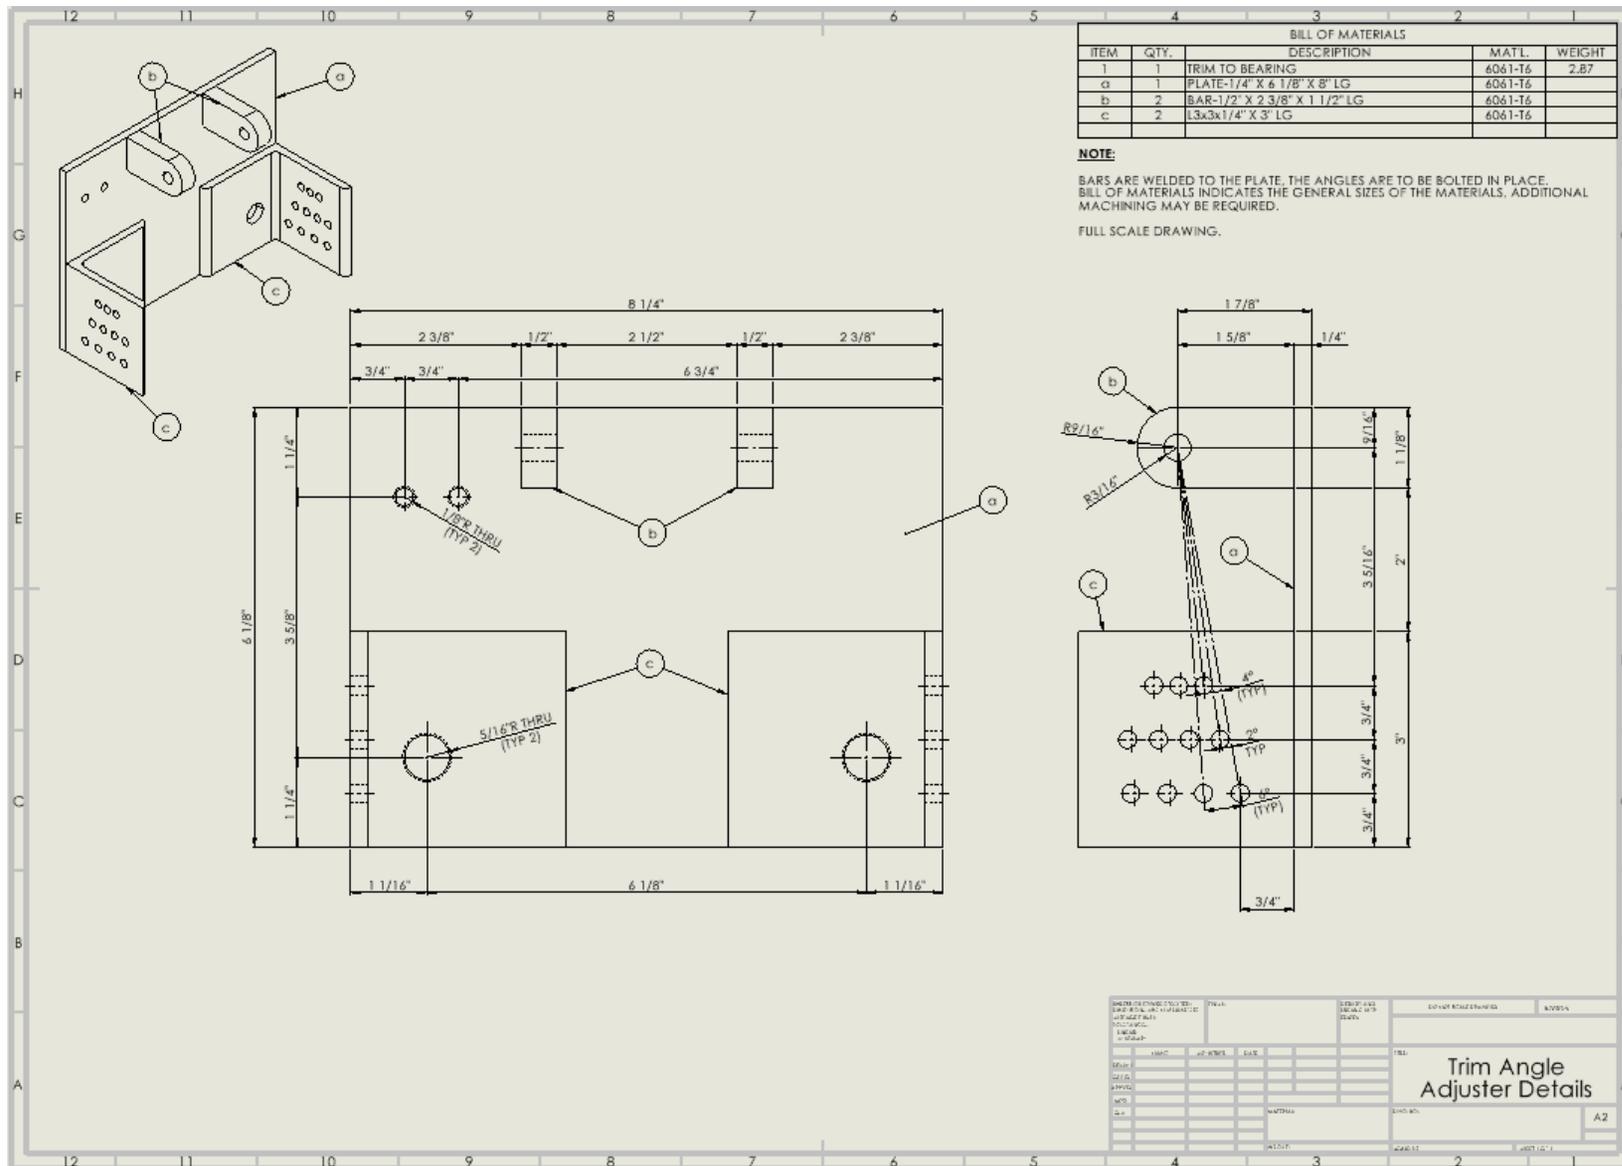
Fabrication Instruction Sheet for Trim Angle Adjuster Half that Bolts onto the Bearing.
